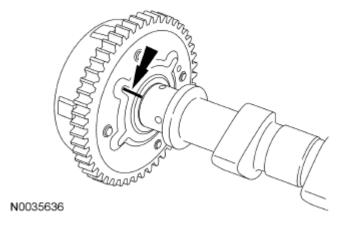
Identifying Sprocket And Camshaft Reference Mark Courtesy of FORD MOTOR CO.
